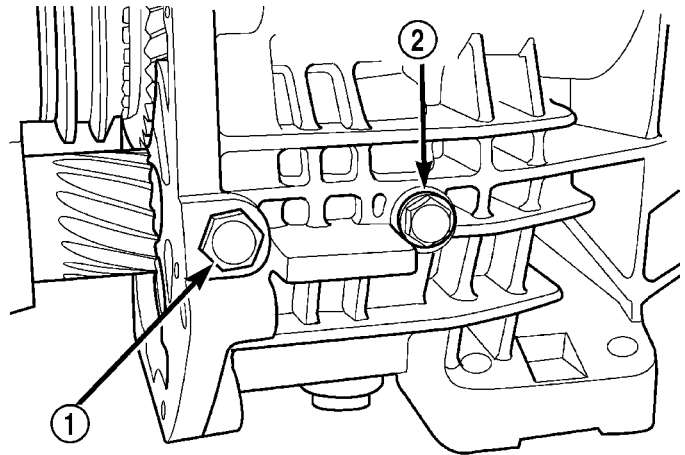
REVERSE IDLER SHAFT/SUPPORT BOLT
